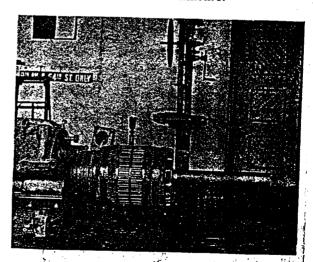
The Other End of Shaft Than That Shown in Fig. 9
